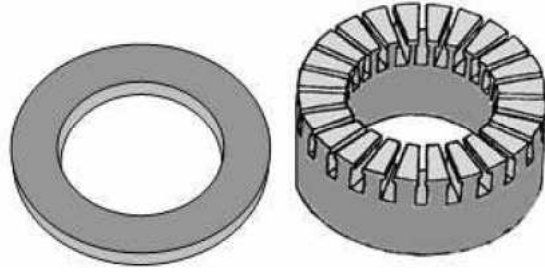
Rotor and stator core assembly for a disk hysteresis motor (from Darabi et al., 2007a).
